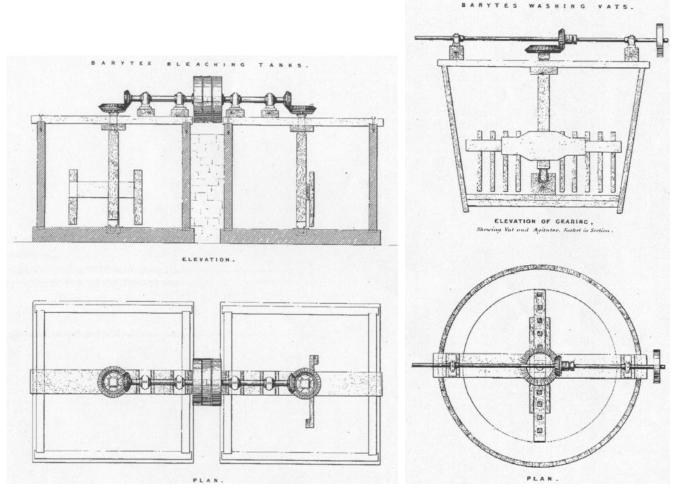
(left): Plan and section of the bleaching tanks within the barytes works (after Addison 1890, fig. 7) Plate 47 (right): Plan and section of washing vats within the barytes works (after Addison 1890, fig. 8)
